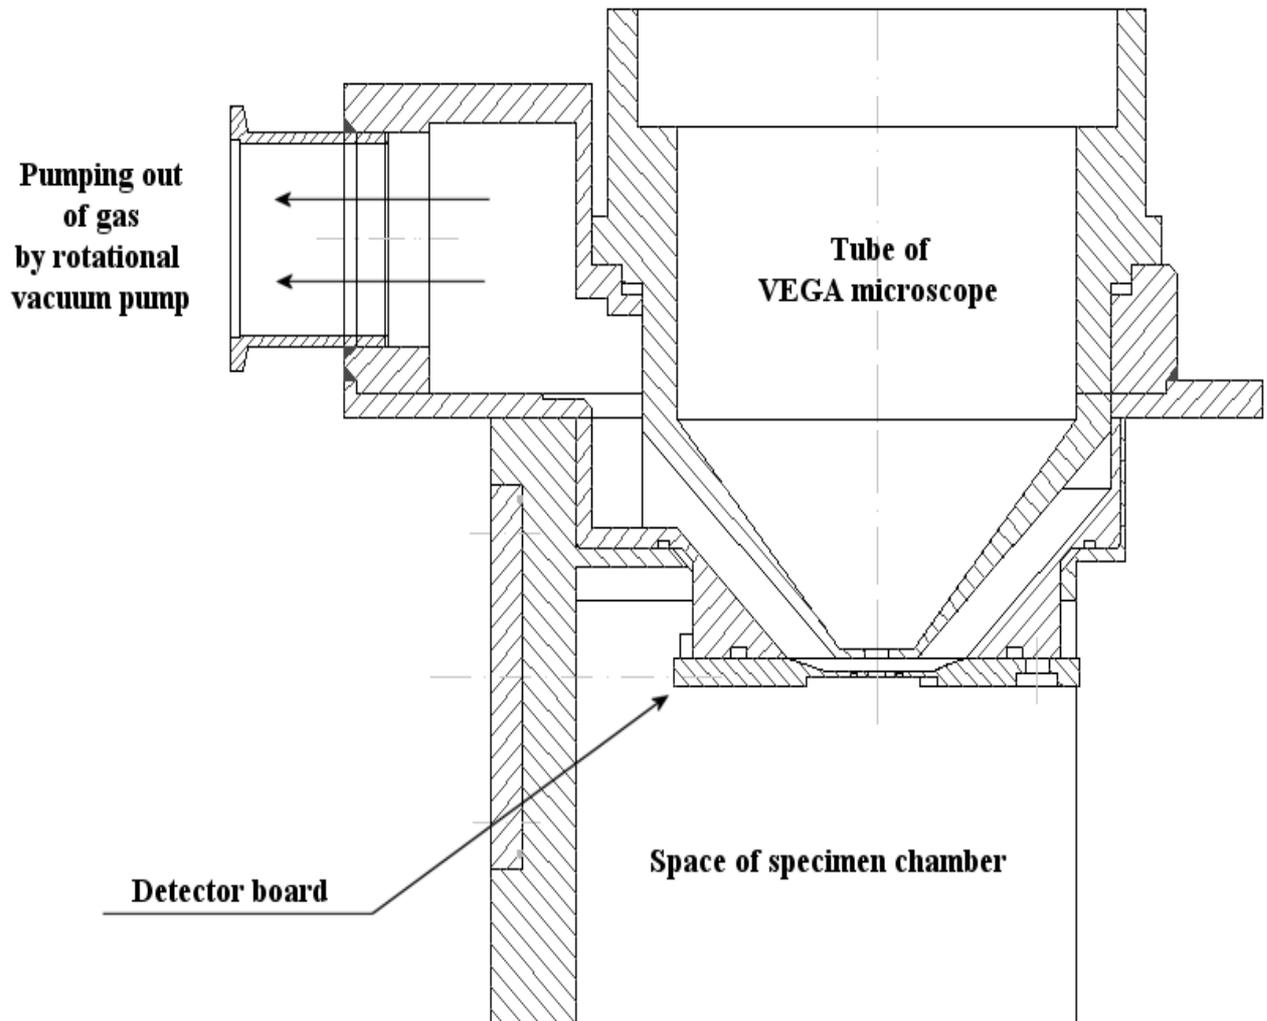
Complete view of adapted configuration of Environmental microscope with differential pumping chamber, detector board, part of specimen chamber and part of microscope tube.
